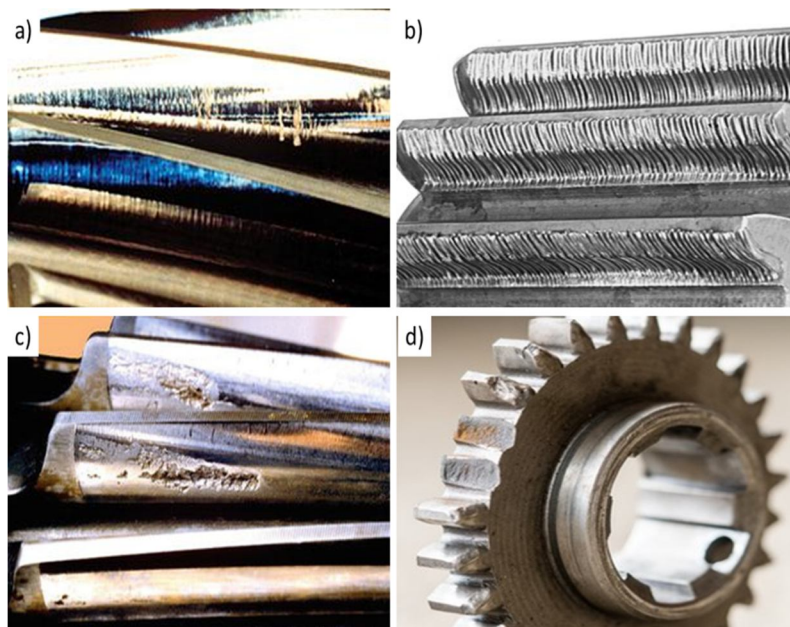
Failure of gear a) Polishing wear b) Abrasive wear c) Corrosion wear d) Fatigue fracture
